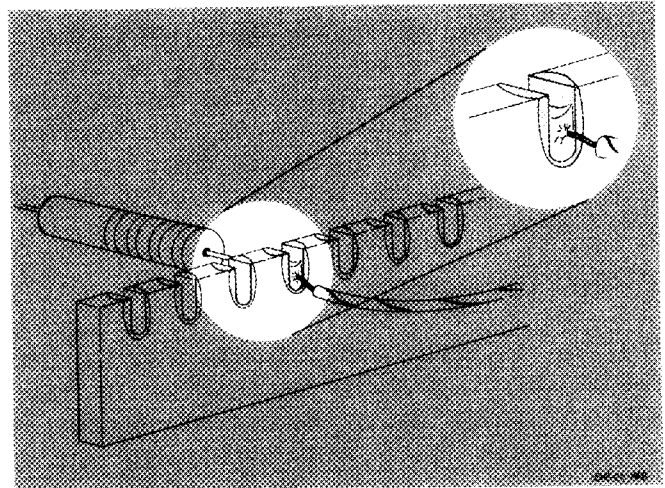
A slight fillet of solder is formed around the wire when heat is applied correctly.
